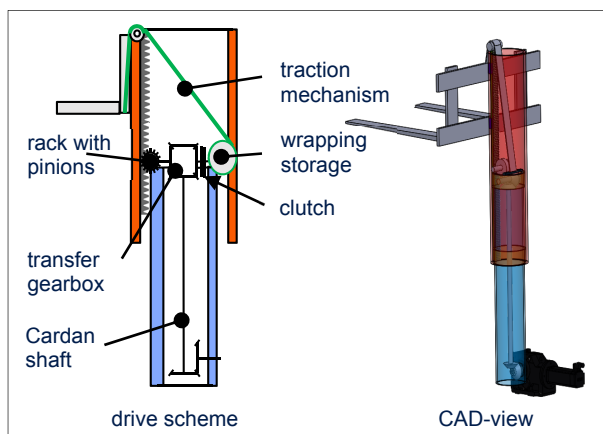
Drive concept with gears and cardan shaft (not to scale)
